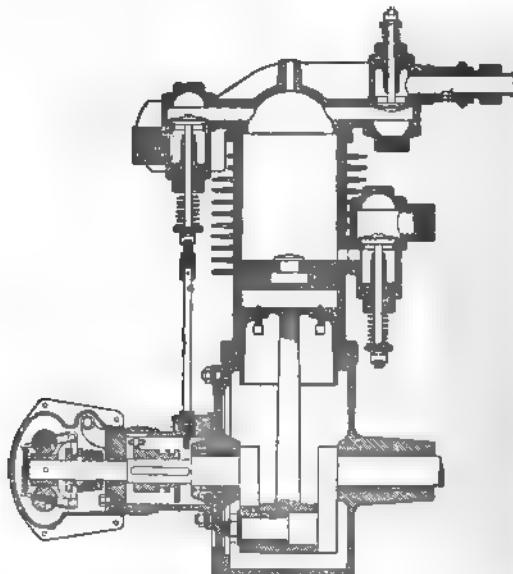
Section through the Fritscher-Houdry Single-cylinder Engine, showing the supplementary or "anticipatory" exhaust valve at the point of piston outstroke. The supplementary exhaust used on modern engines is similar to this, only mechanically operated.
